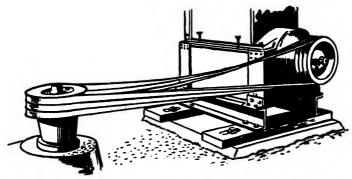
Typical quarter-turn V-belt drive in which a gas engine operates a vertical turbine pump. This is the simplest form of such a drive. Engine can be moved for belt take-up.
